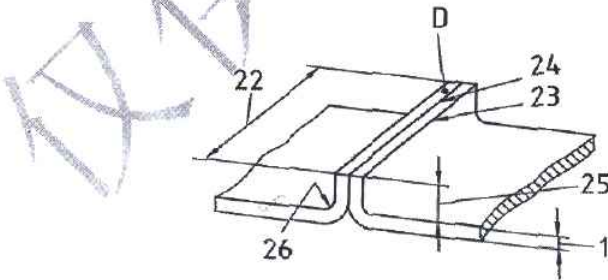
Preparation for butt weld between plates with raised edges
